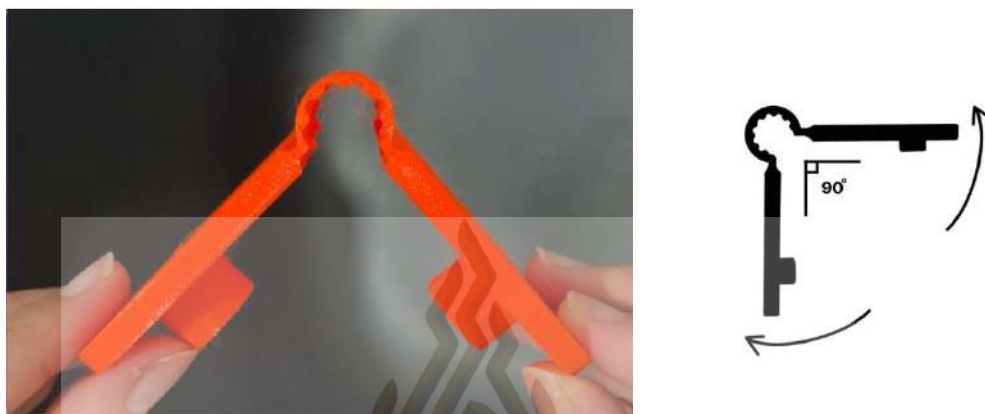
Experimental 3D printing techniques of connectors 03.
